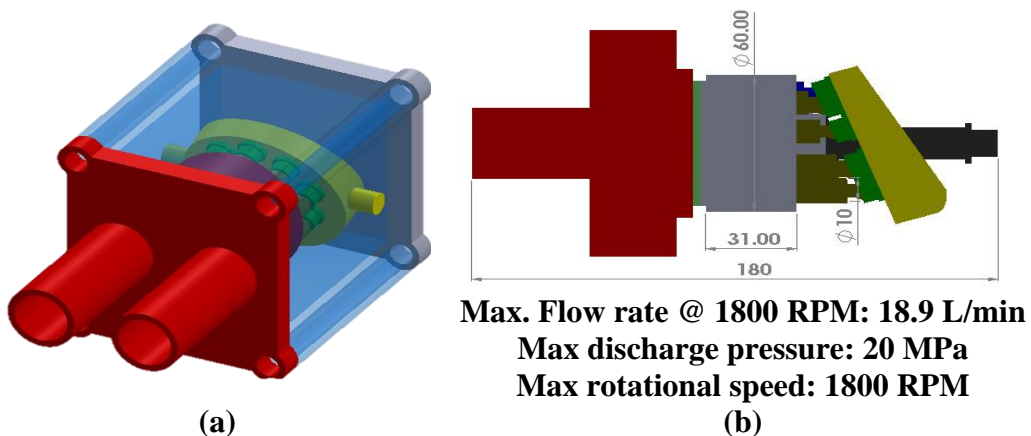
PVB5 Axial piston pump, (a) CAD drawing, (b) pump aspects.
